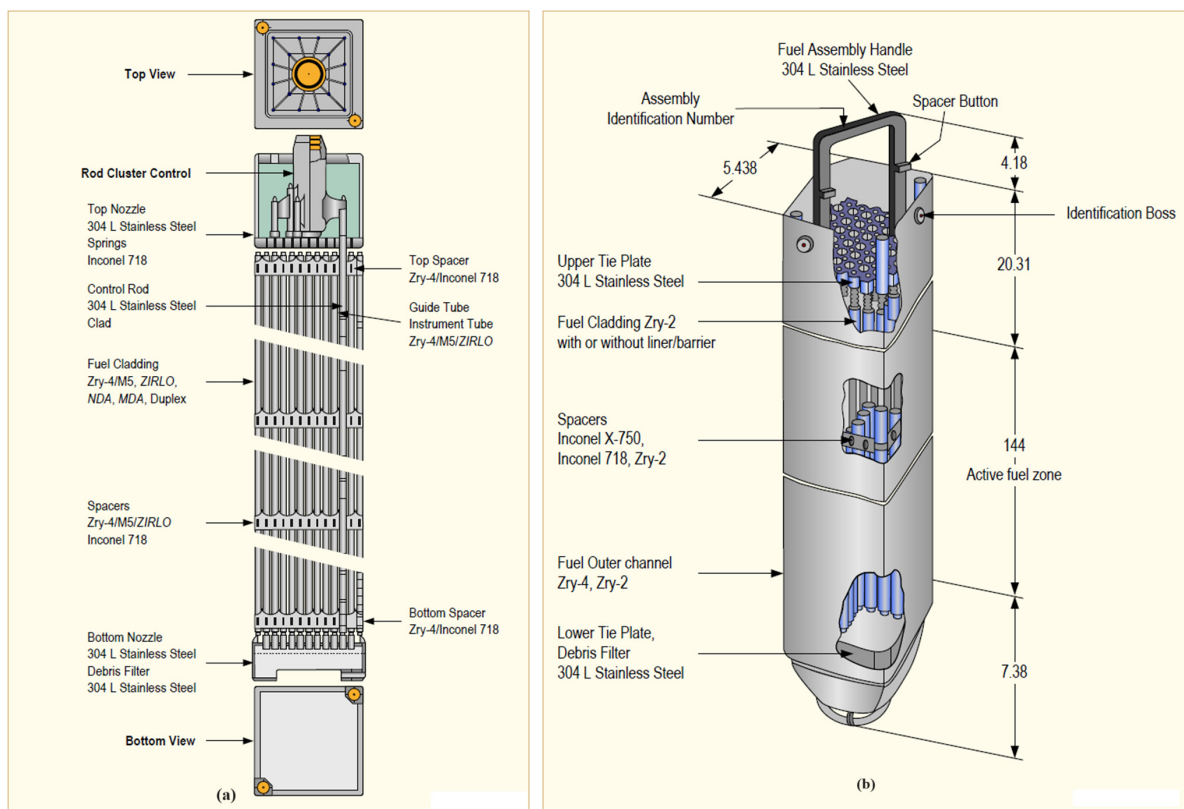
Typical (a) pressurized water reactor fuel assembly and (b) boiling water reactor fuel assembly (Strasser et al. 2014). Dimensions in inches.
